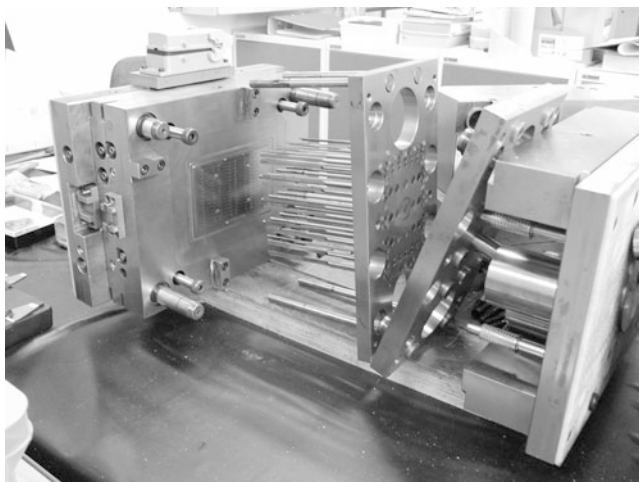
Injection molding tool for microfluidic devices with the size of a microtiter plate. Note the mechanical complexity
